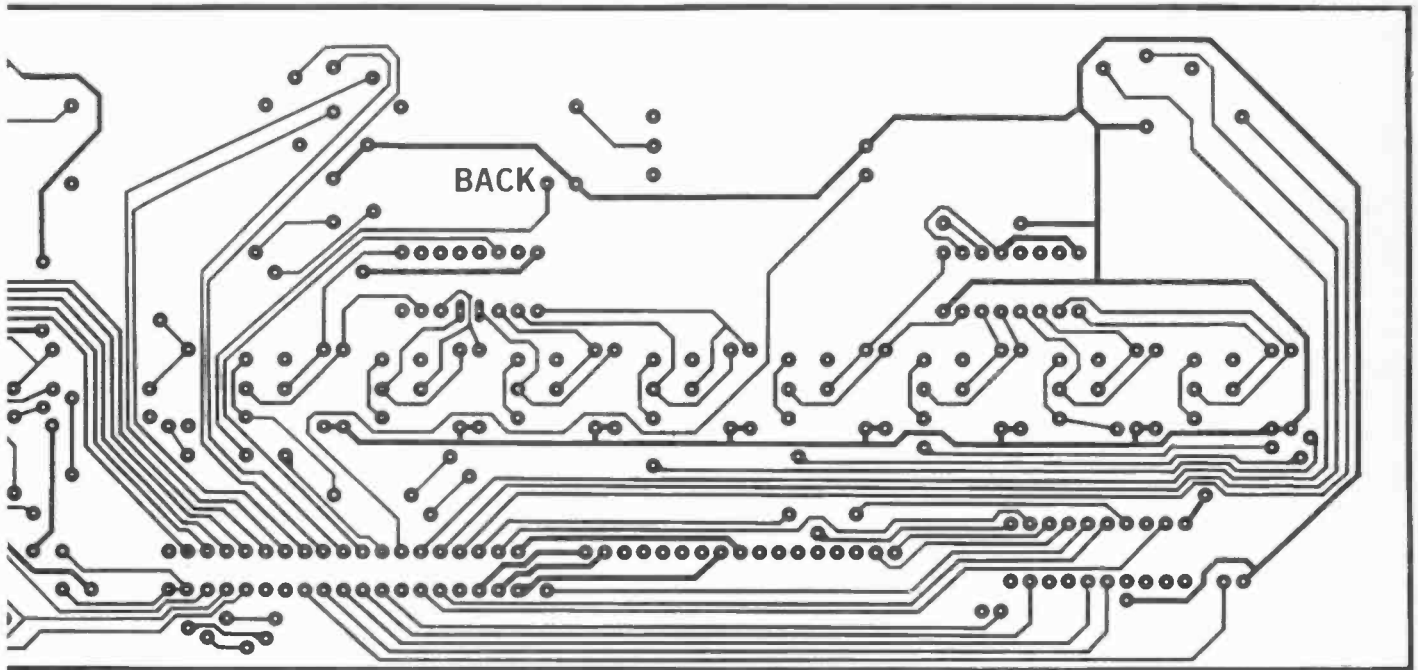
(above). Front panel p.c.b. layout (track side, actual size)
